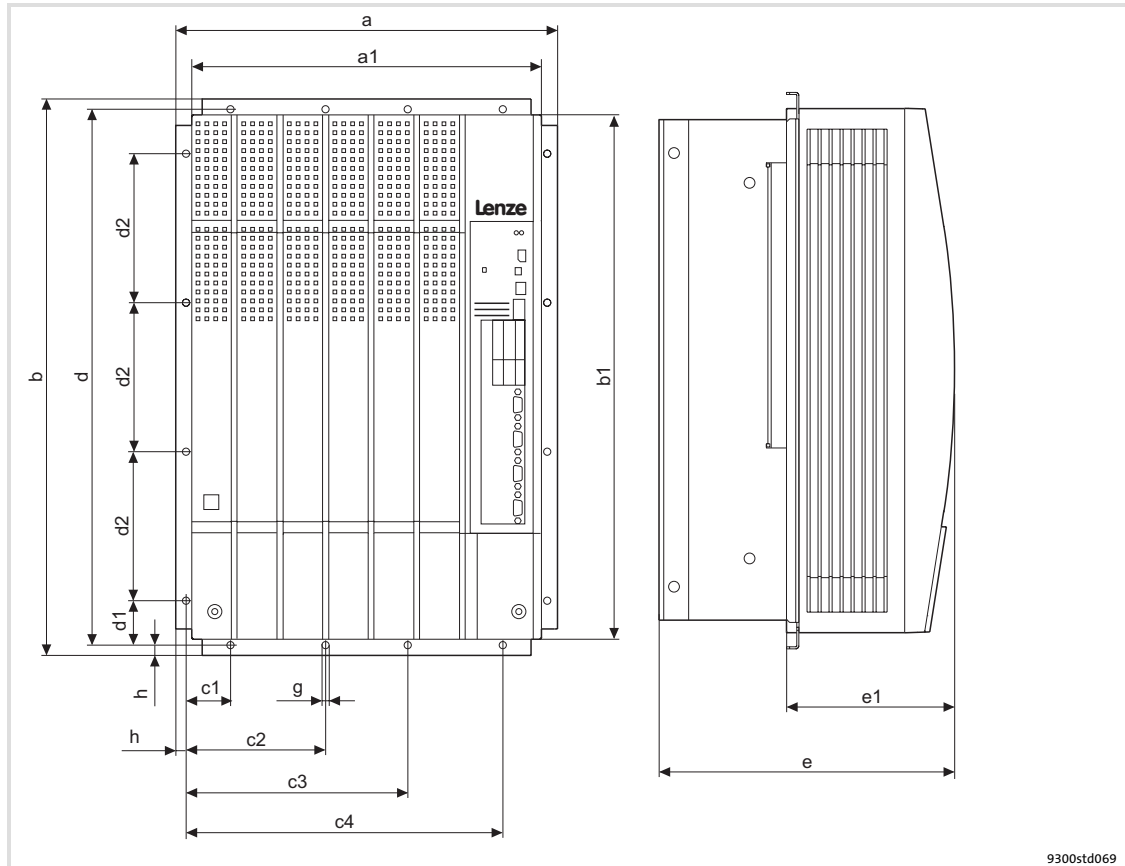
Dimensions for thermally separated mounting 45 kW
